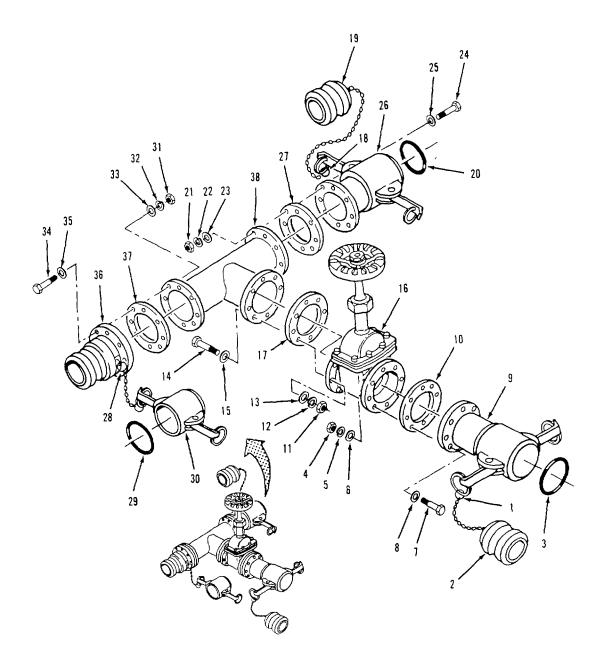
Tee and Gate Valve Assembly (9114-Y6) Disassembly.
